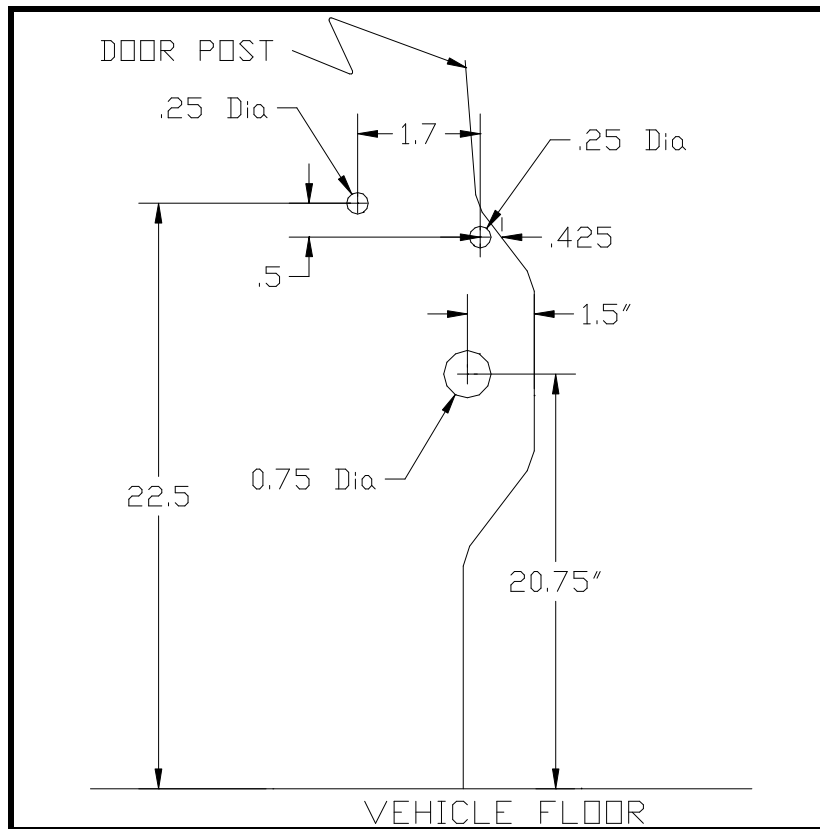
A]: DOOR POST DRILLING DIMENSIONS
